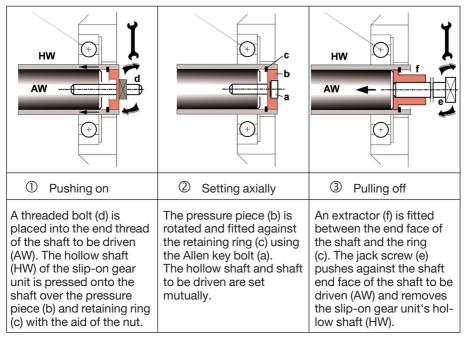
Fitting aids for shaft-mounted gear units
